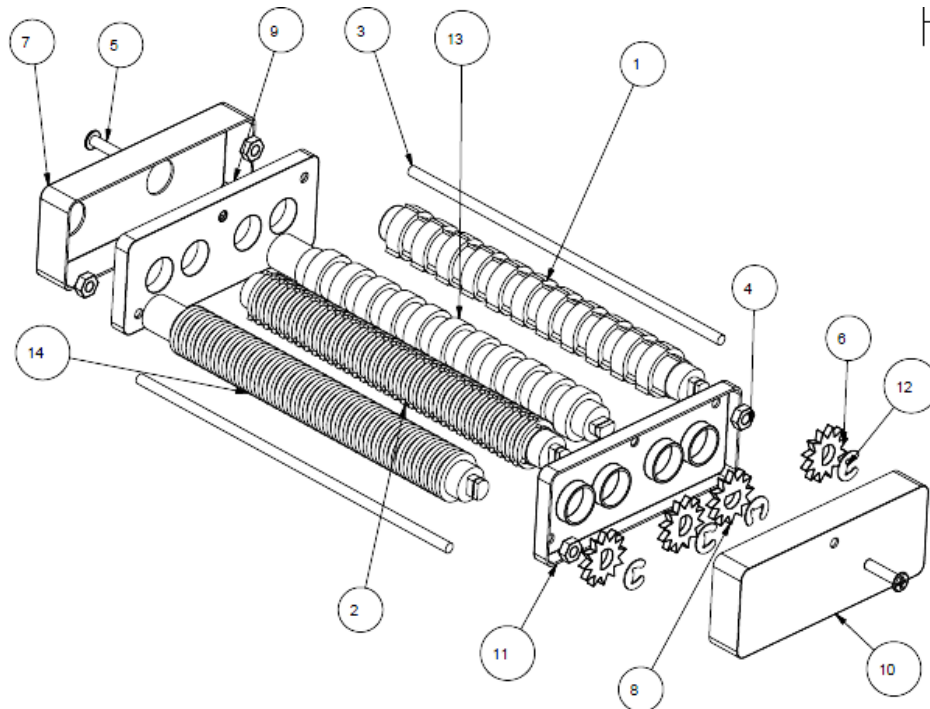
Exploded view of the modified chinchin cutting compartment; (1) Main cutting shaft with protruded blades; (2) Mini-cutting shaft with protruded blades; (3) Connecting rod; (4) Connecting nut; (5) Cover screw; (6) Driven gear; (7) Shaft cover; (8) Driving gear; (9) Inner shaft cover; (10) Gear assembly cover; (11) Inner cover for gear assembly; (12) Lock pin; (13) Main driving shaft; and (14) Mini driving shaft.
